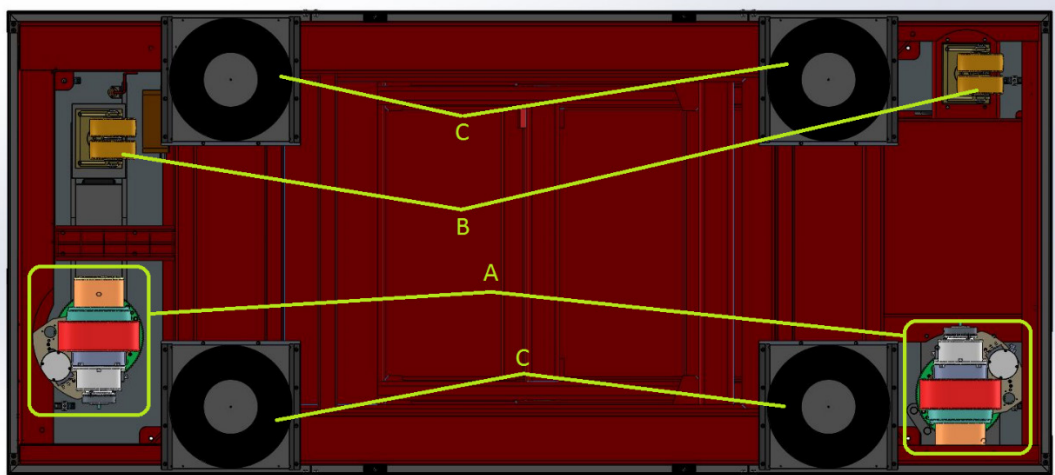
Bottom view of Solving electric modular transporter for the train industry. A: Front and rear drive unit, B: Swivel wheels, C: Air bearings.
